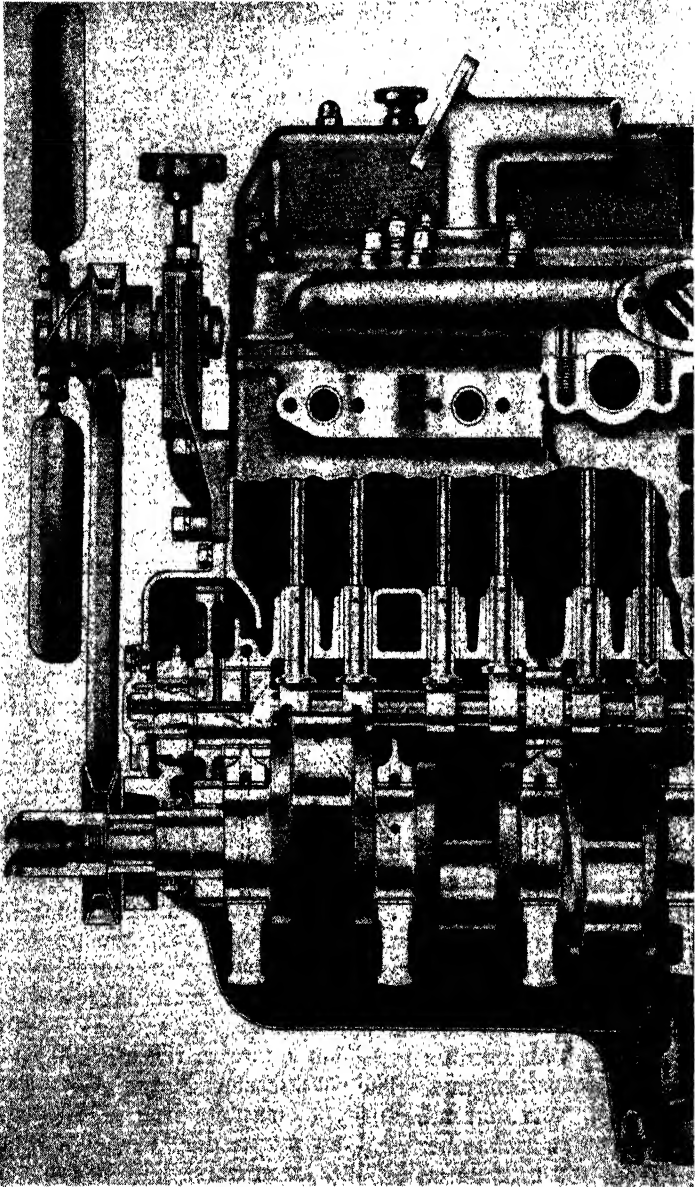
A.—HERCULES ENGINE, FORWARD END.
